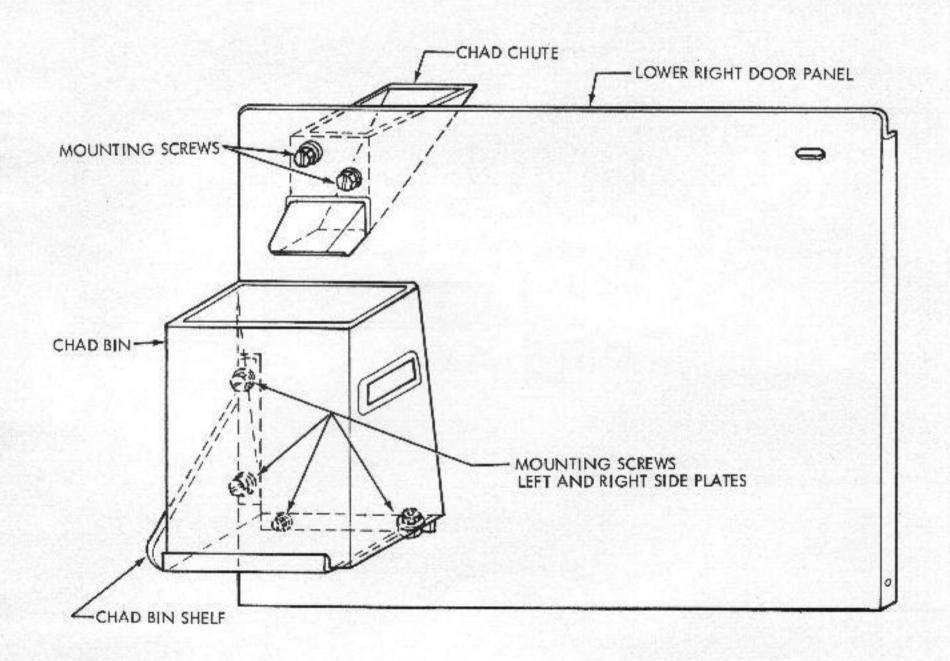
CHAD CHUTE AND CHAD BIN ASSEMBLIES -AUTOMATIC SEND-RECEIVE SET
